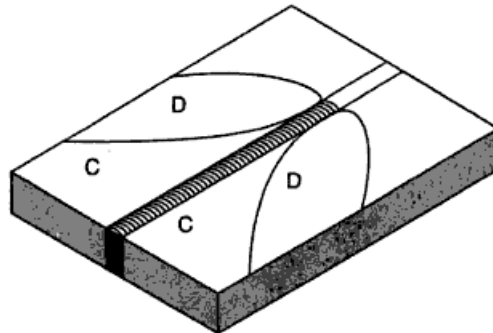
Heating and Cooling of a Long Butt Weld
